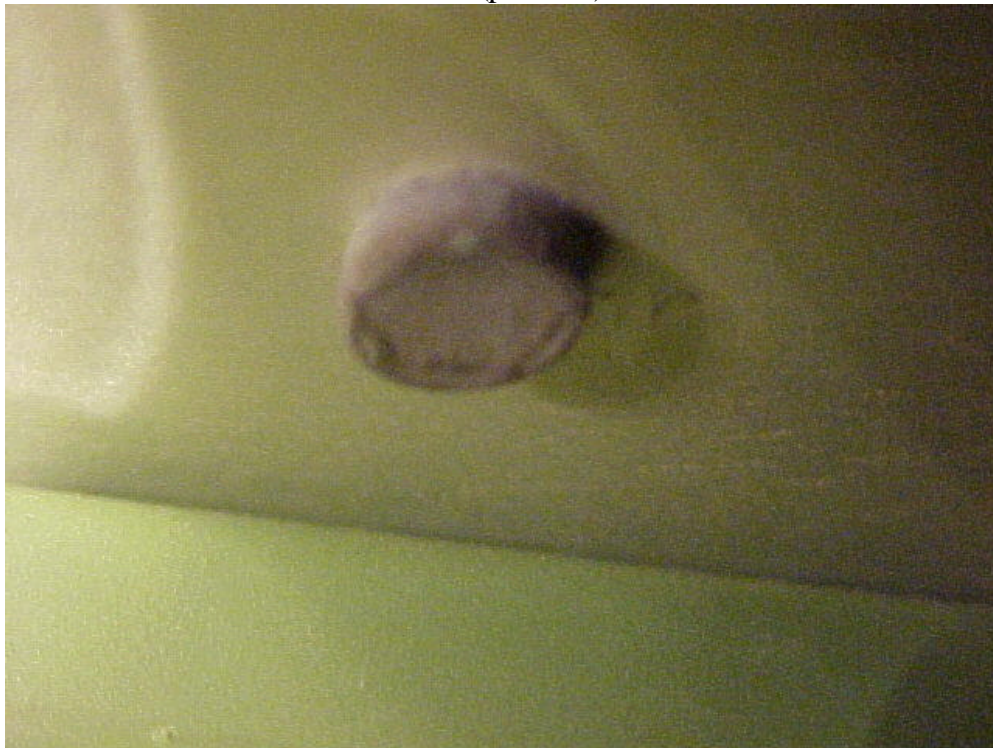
Photograph showing internal detailed visual inspection indication at BS 420, stringer 4L, rivet 10 (panel F1).
